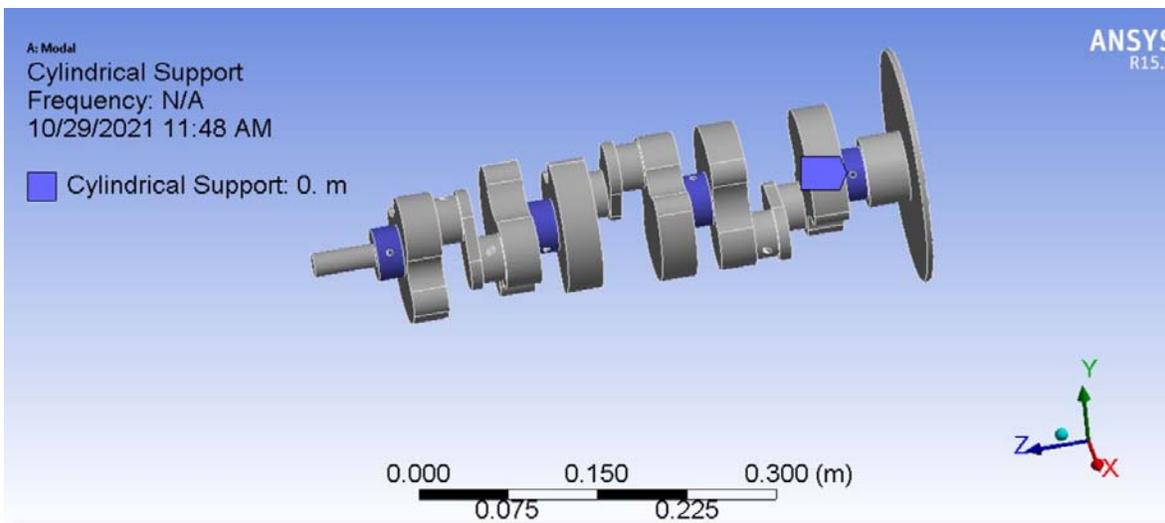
Cylindrical supports for journal bearings' positions on the crankshaft
